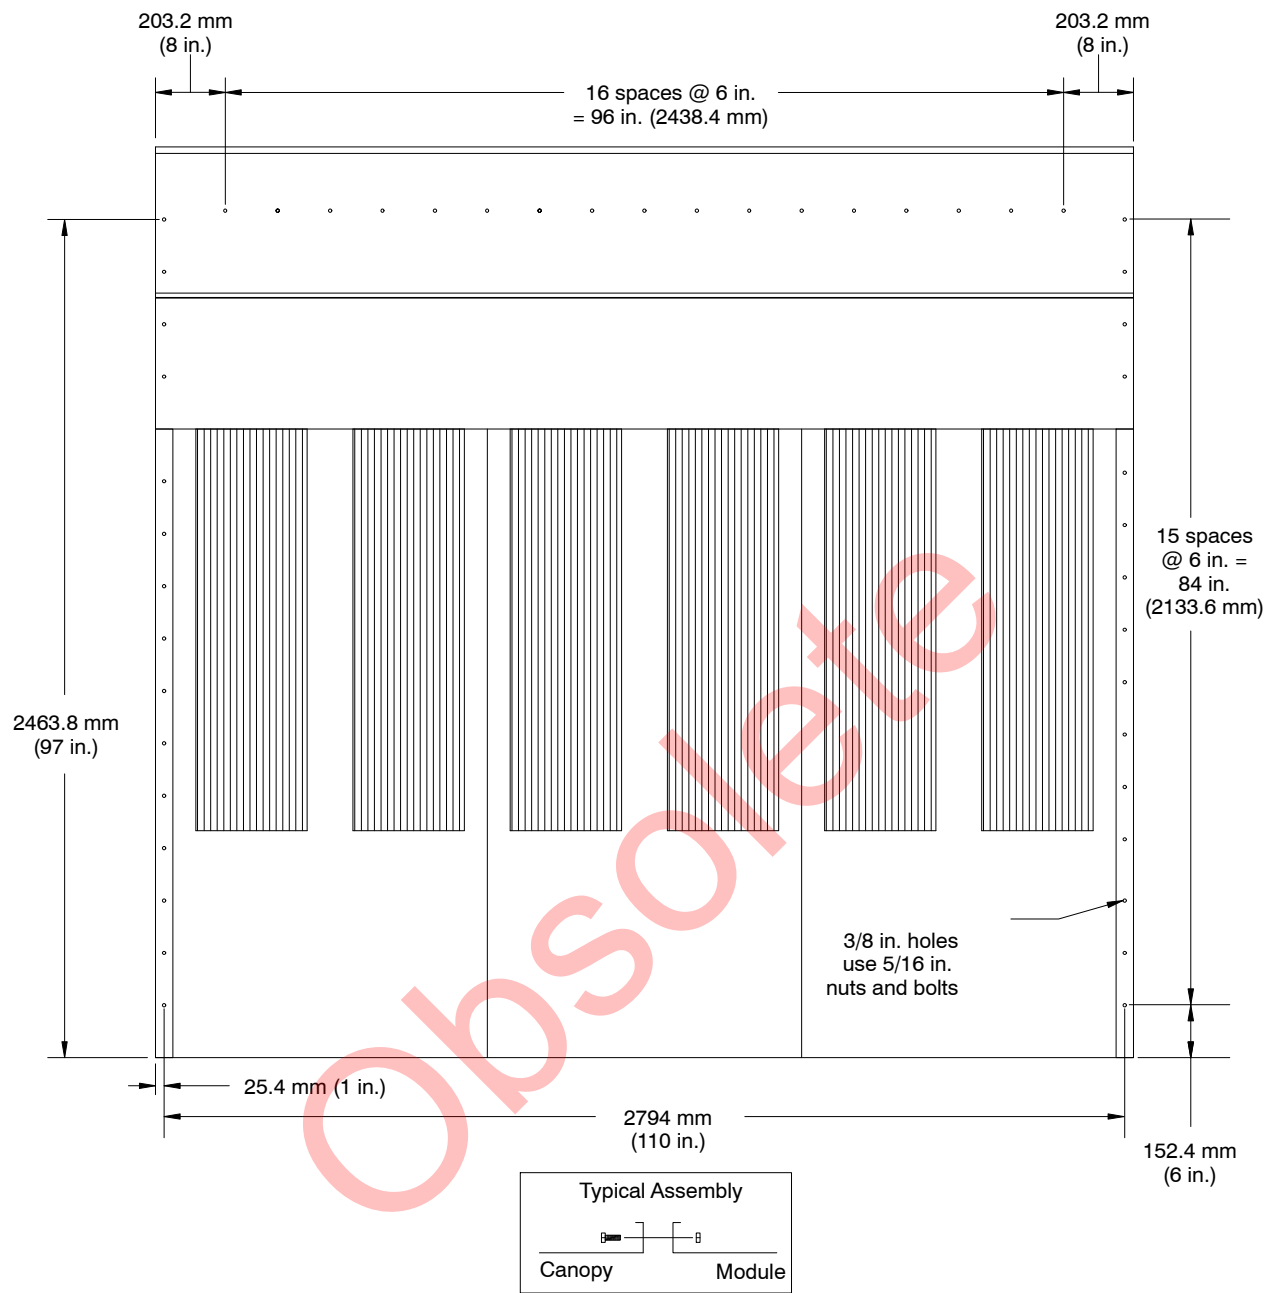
9,000 CFM Module to Canopy Mounting Dimensions
